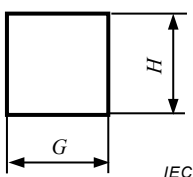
Fixture cut-out information for LC duplex (square flange) adaptor
